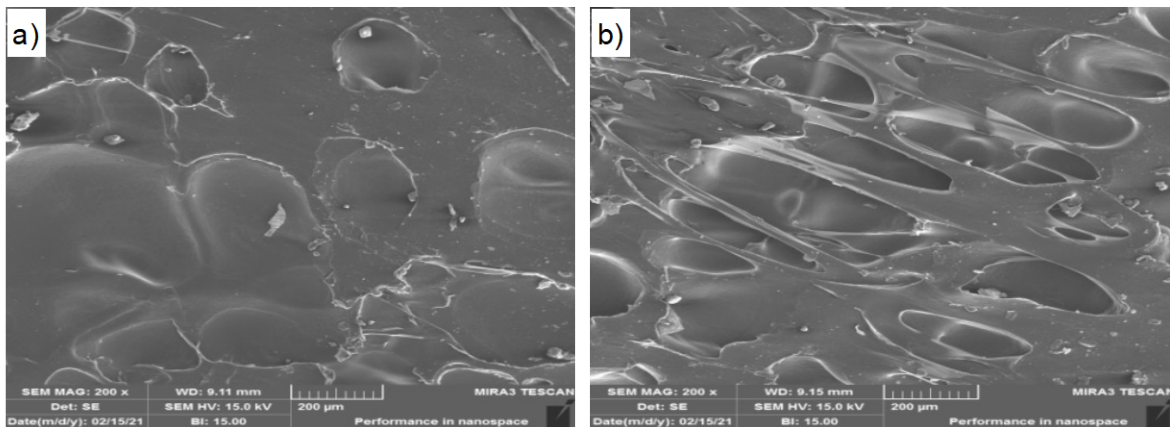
Fracture surfaces of the single lap shear specimens fabricated at rolling speed of: a) 25 rpm and b) 45 rpm
